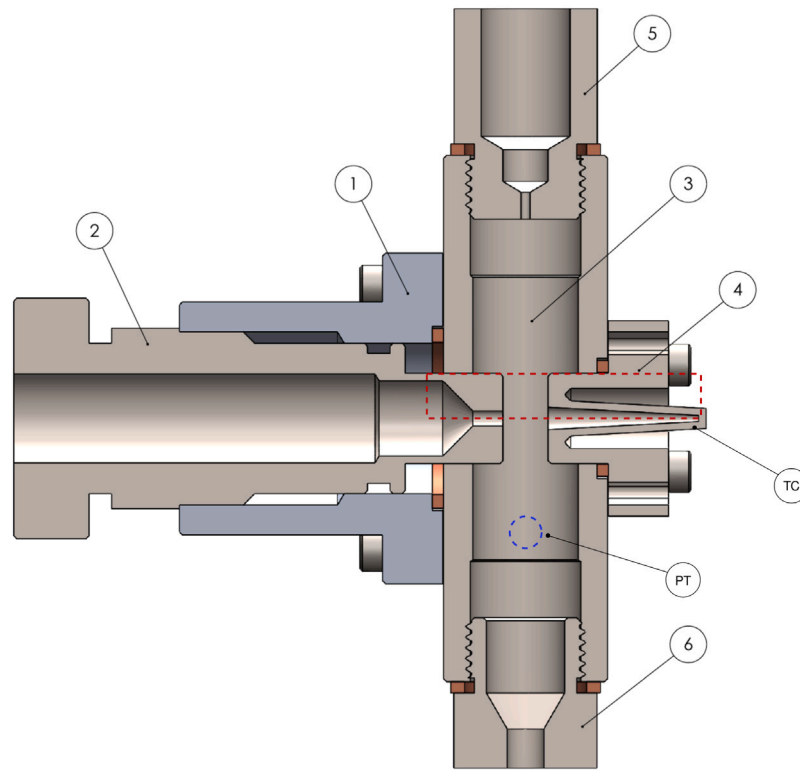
Section view of the igniter assembly, (1) oxygen injector support, (2) oxygen injector, (3) combustion chamber, (4) resonator, (5) methane injector, (6) exhaust nozzle. The location of a spot welded thermocouple is indicated as TC. The port for the pressure transducer (PT) is on the opposite half of the section view. The red dashed line represents the simulation domain, described further in Section 4.
